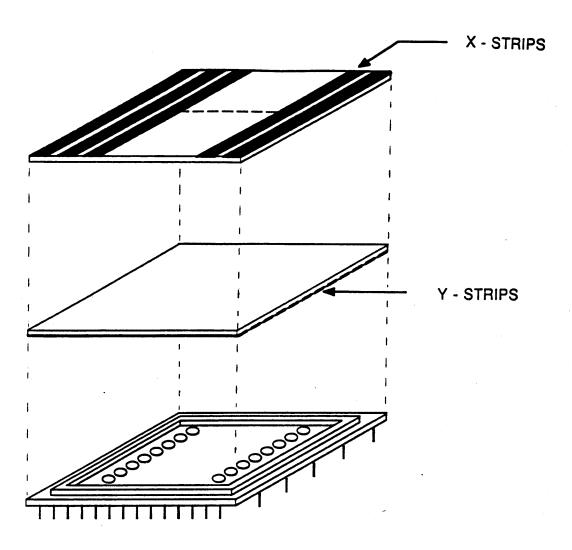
Exploded view of the lay-out of the packaging of two detectors with perpendicular strips.
